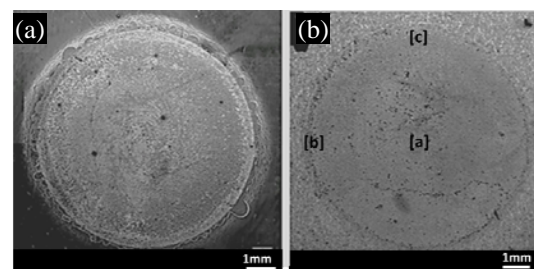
SEM macrographs showing tensile-shear fracture surface of dissimilar FSSW joint: (a) Al side (b) steel side
